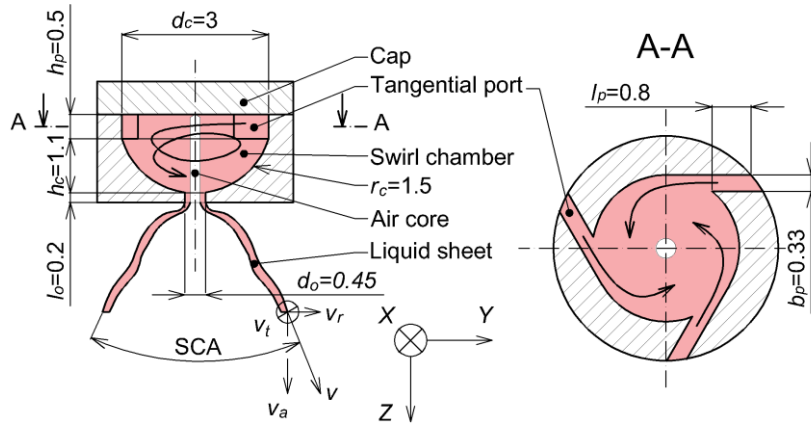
Schematic layout of the atomizer with main dimensions in millimetres: side section with the coordinate system (left) and top section (right).
